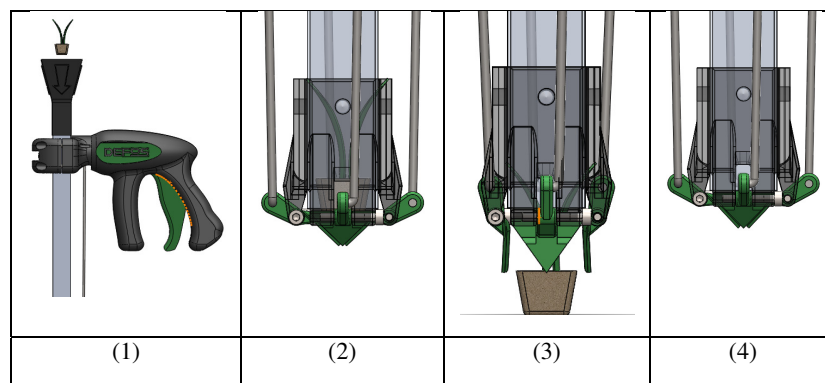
Assembly drawing. (1) The seedling is inserted inside the hopper 2) the seedling immediately felled by gravity into the bottom of the square tube. (3) The operator will press the lever which is a linkage that will open up the penetrator. 4) Seedling is planted to the ground and spring mechanism will retract and close the penetrator for next cycle.
